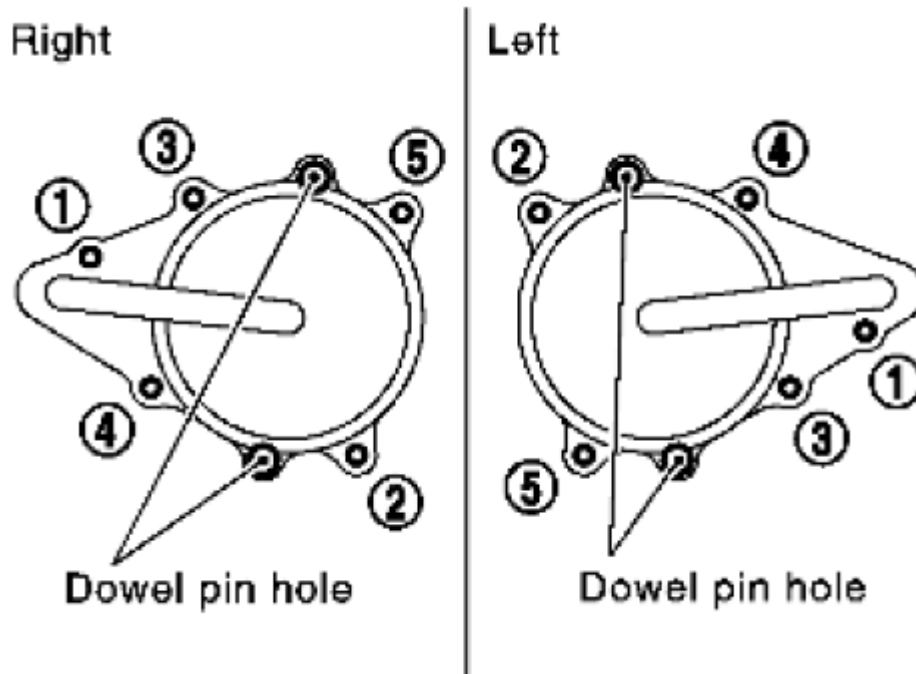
Identifying Dowel Pin Hole Location And Bolt Tightening Sequence
